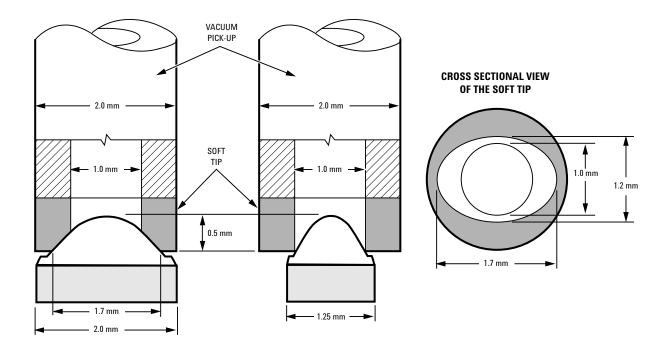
Soft Tip Vacuum Pick-up Tool for Extracting Avago Technologies' HSMx-C540 from Embossed Carrier Tape.
